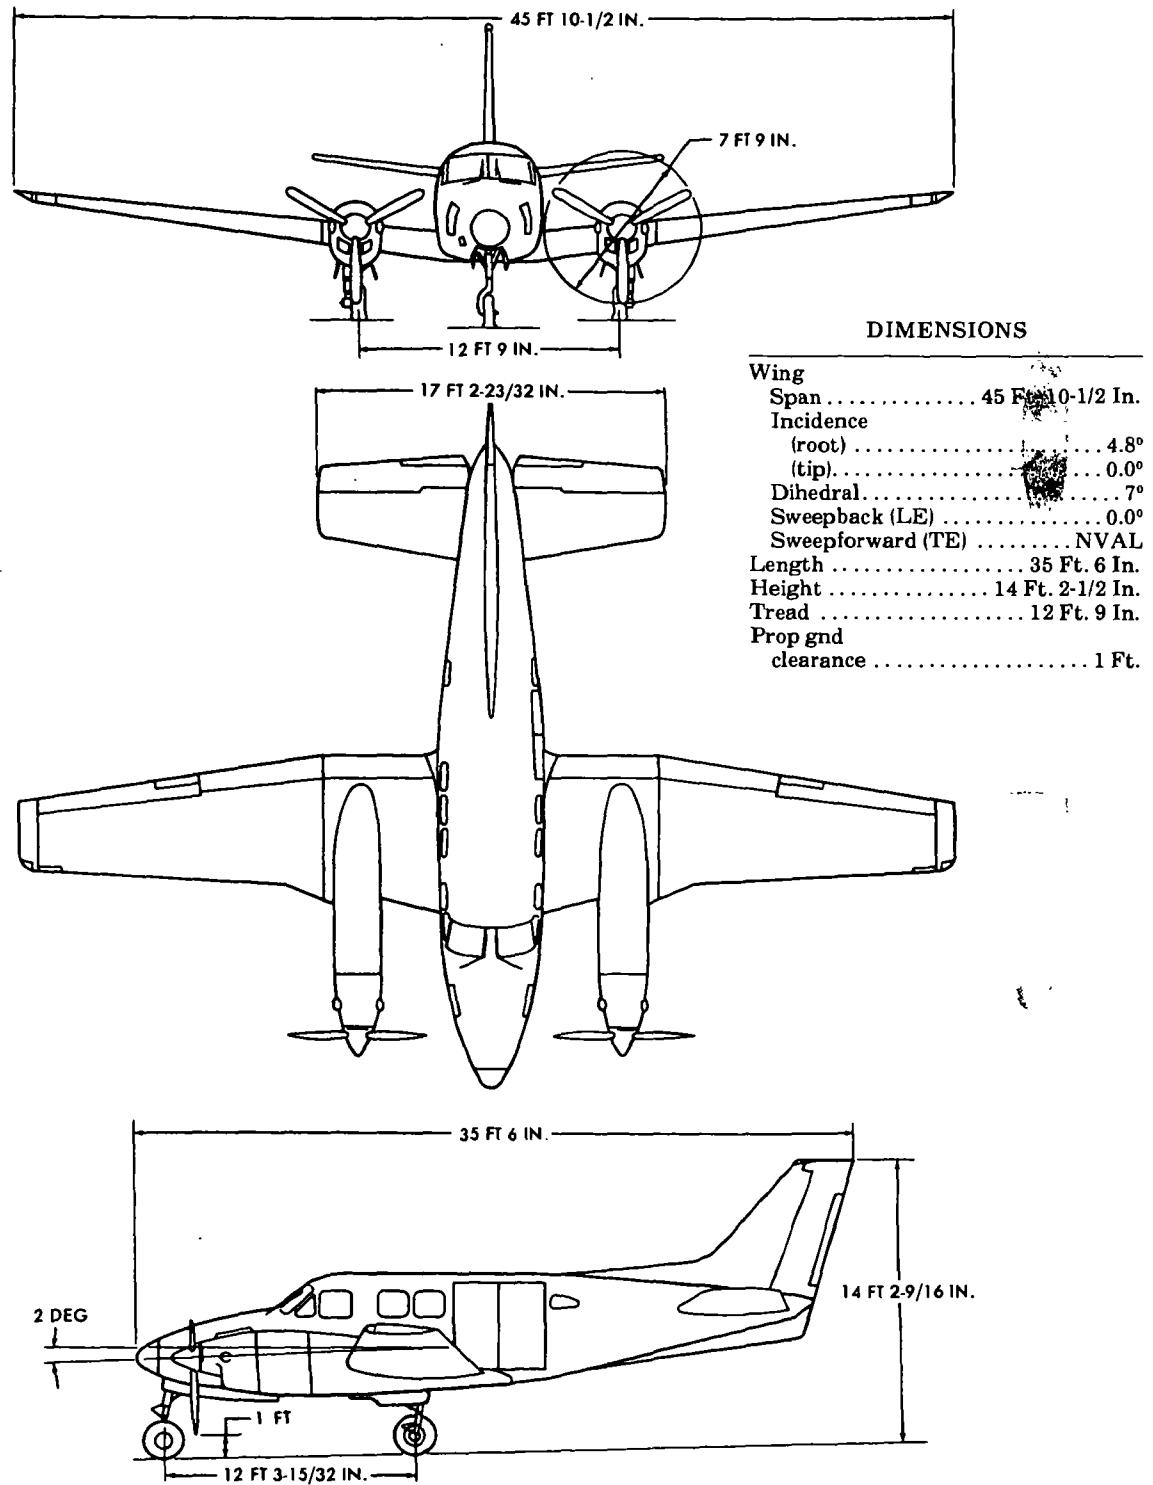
Principal Dimensions, U-21A, U-21G, (Ute)
